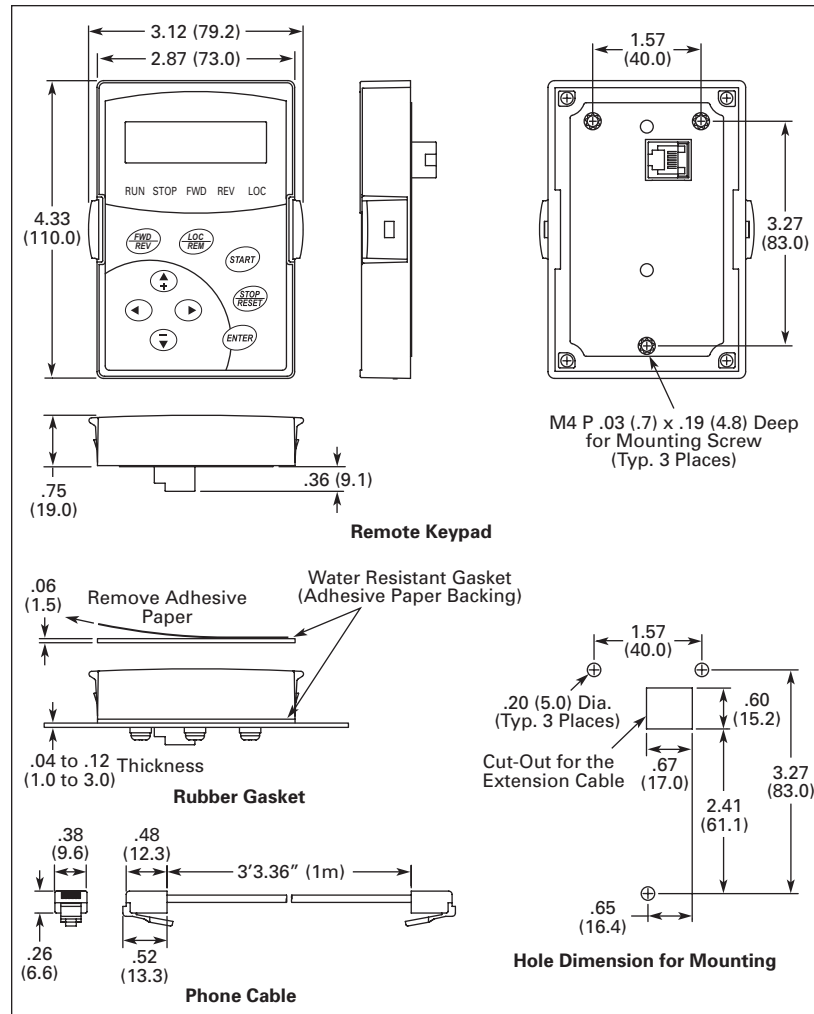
Approximate Kit Dimensions in Inches (mm)
